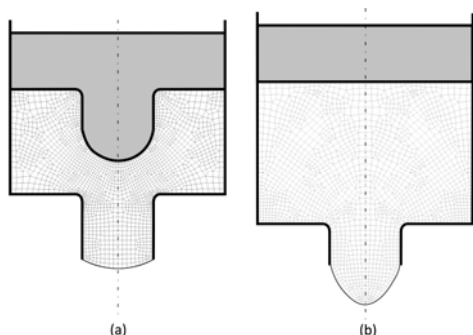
a) forward extruding of the lower billet with use the punch with a toe; b) initially formed upper billet
